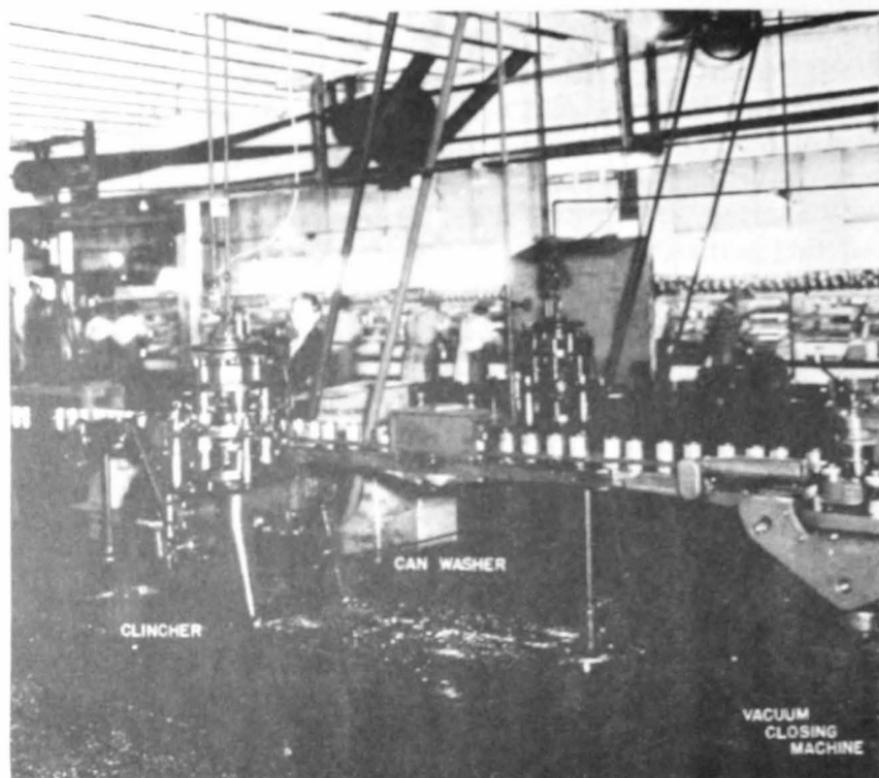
Salmon canning line; clincher, can washer and closing machine. (Courtesy, Continental Can Company, Inc.)
